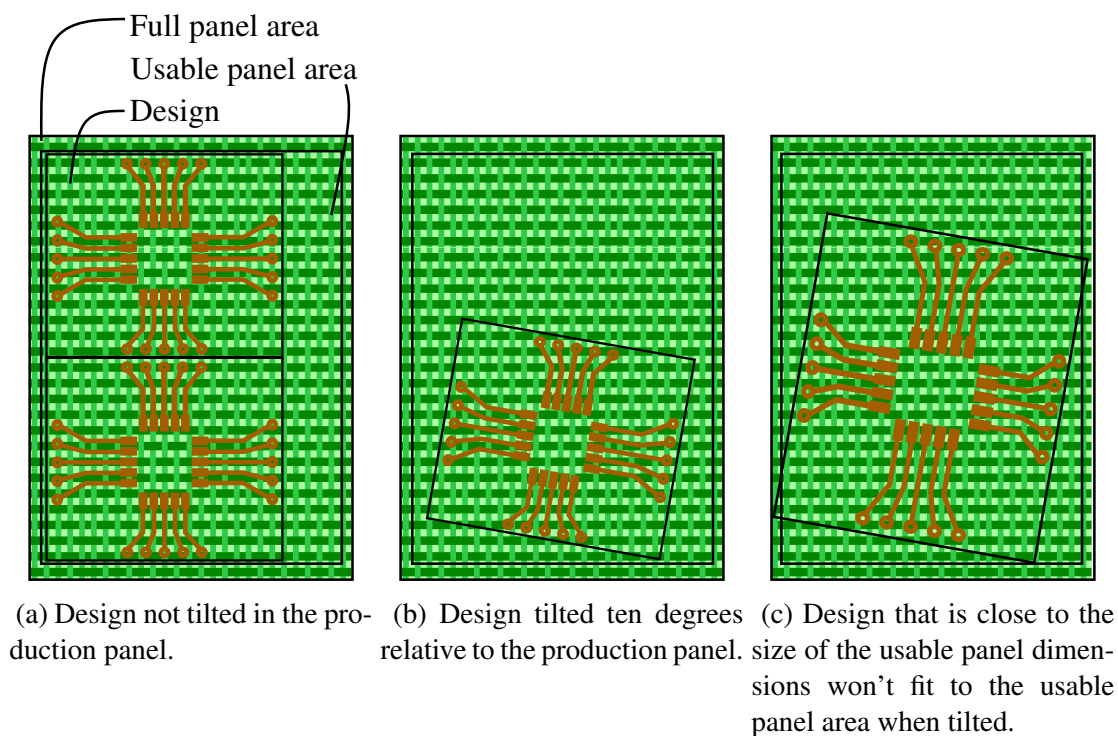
PCB design tilting relative to production panel. PCB fabricators use certain size panels on which the design needs to fit.
